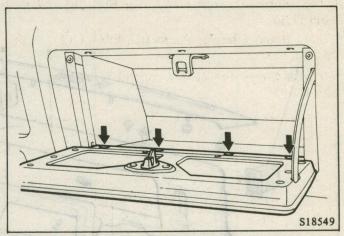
Adjusting Lid to Instrument Pad Clearance
